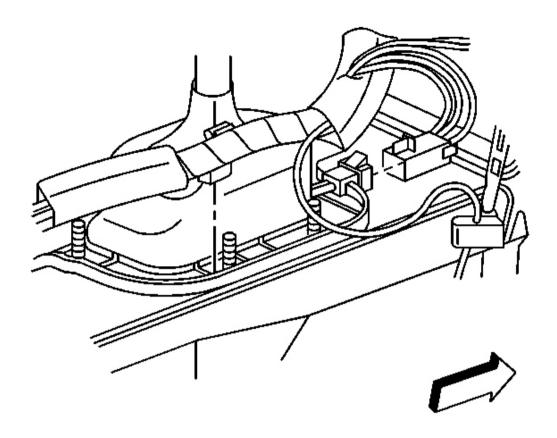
Floor Shift Control Electrical Connector & I/P Wiring Harness Retaining Clip Courtesy of GENERAL MOTORS CORP.
